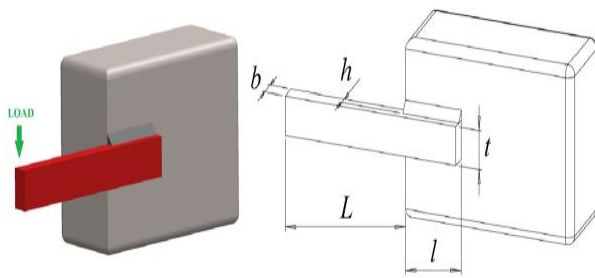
The schematic view of the welded beam design problem [12, 13]
